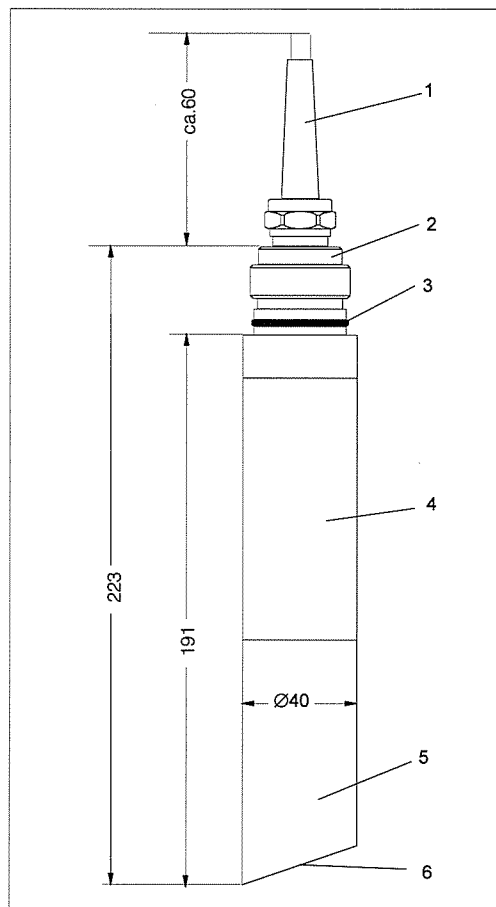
Dimensioned drawing of CUS 1 / CUS 4
